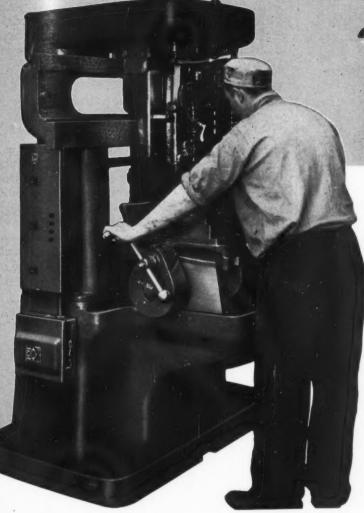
Bomb burster casing utilizes ring-projection welding, eliminating expensive machining operations
